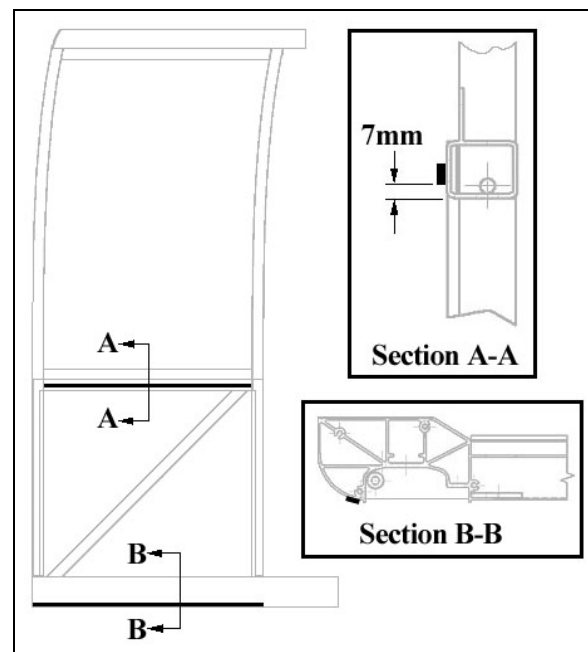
SIDE PANEL INSTALLATION – DOUBLE FACE ADHESIVE TAPE APPLICATION ON THE SLIDE-OUT STRUCTURE
